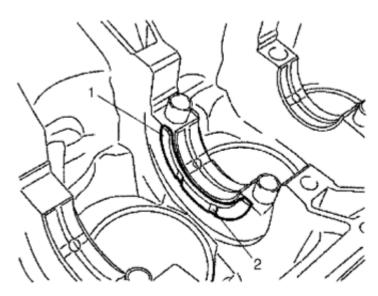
Identifying Thrust Bearings Courtesy of SUZUKI OF AMERICA CORP.
